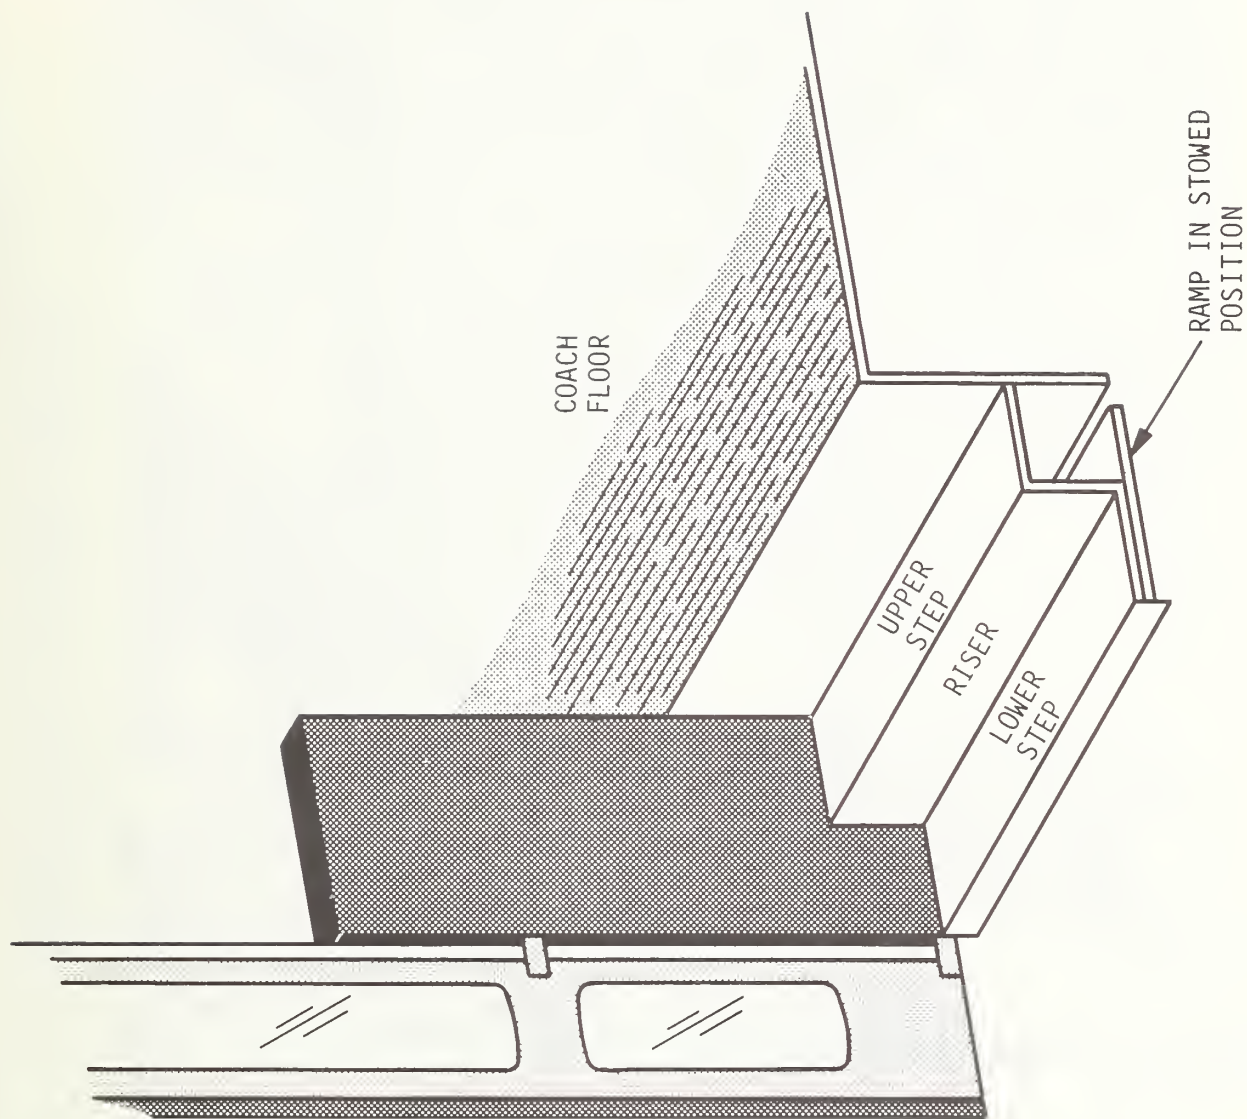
SKETCH OF LIFT IN STOWED/STAIR CONFIGURATION
